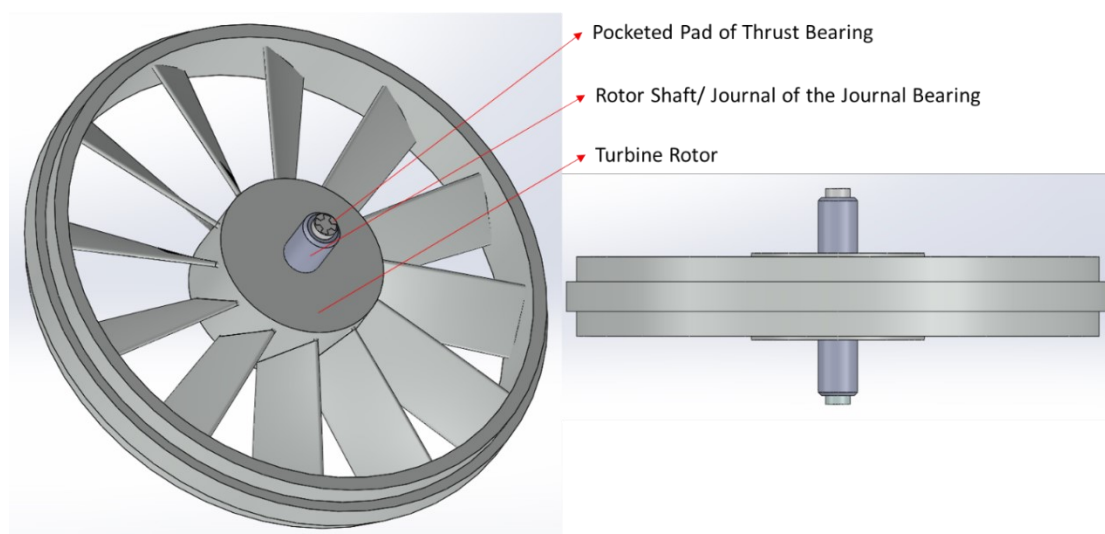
Assembly of the Turbine Rotor, Rotor Shaft and the Patterned Rotating Pads of the Micro Thrust Bearing
